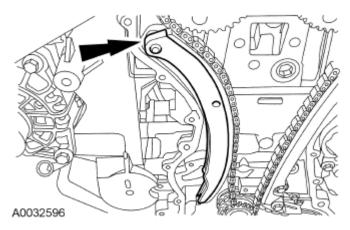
Locating Timing Chain Tensioner Arm Courtesy of FORD MOTOR CO.
